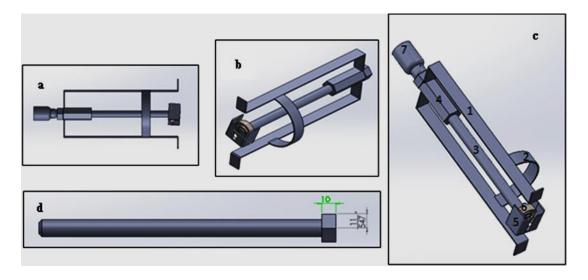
The primary design of electric nail removal device, using SolidWorks 2013 x64 Edition, a) top view, b and c) oblique view, d) side view c: 1) hook, 2) bearings, 3) screw, 4) nut, 5) chuck, 6) the body, and 7) the shield.
